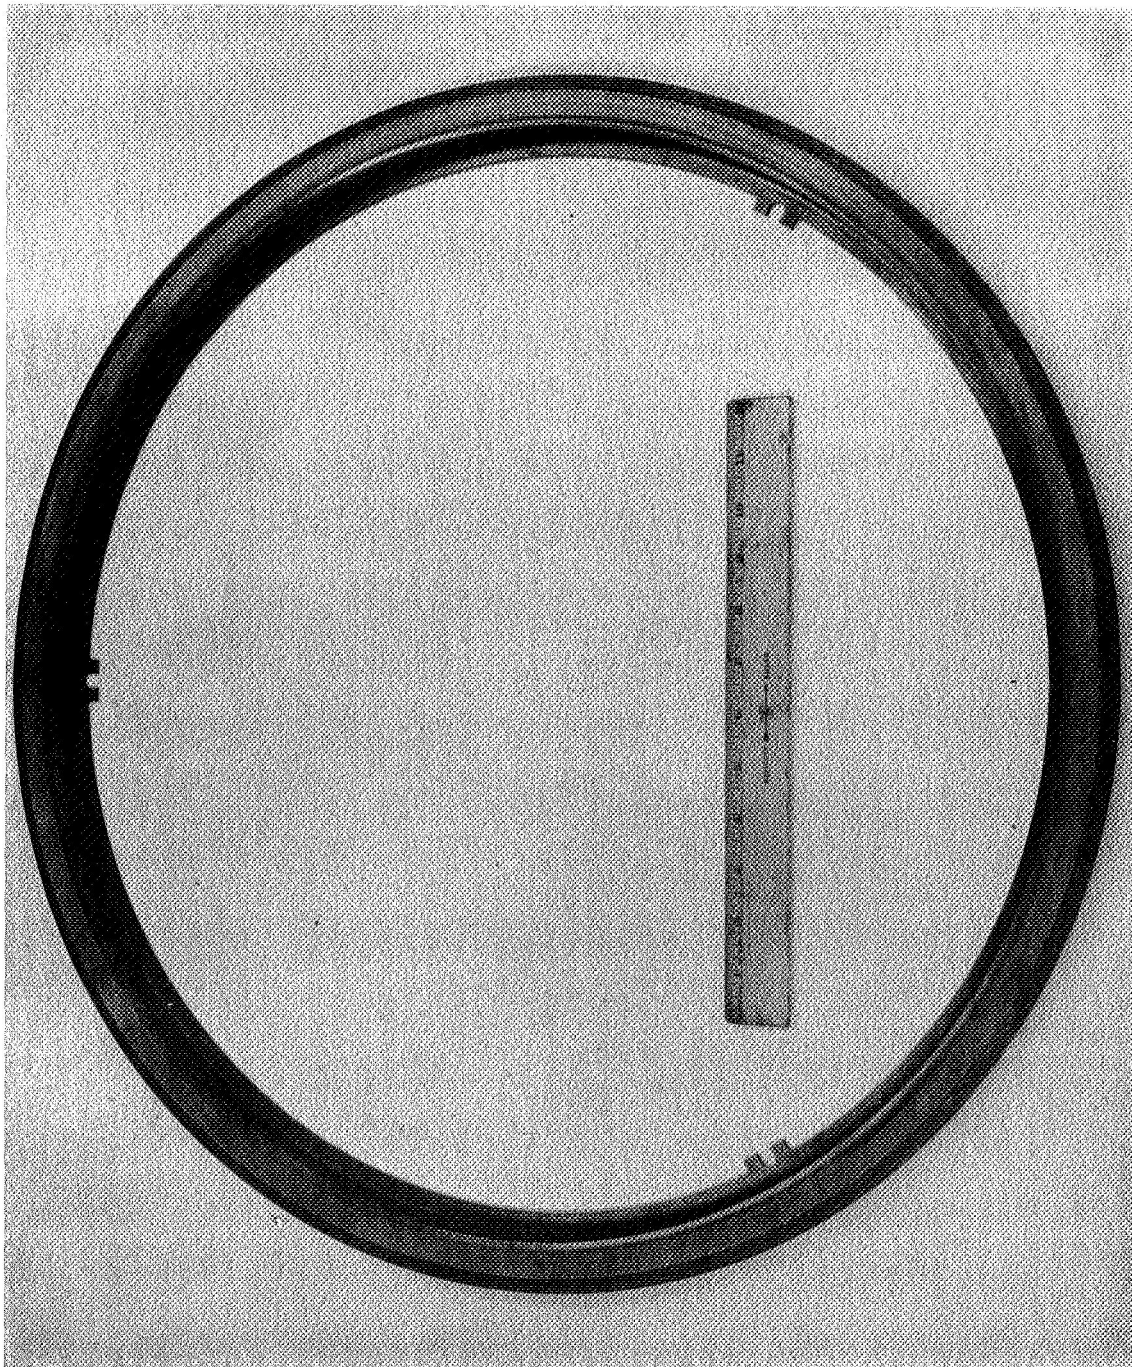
Flight-Weight Bottom Seal After Hot Dynamic Test (C70030638)
